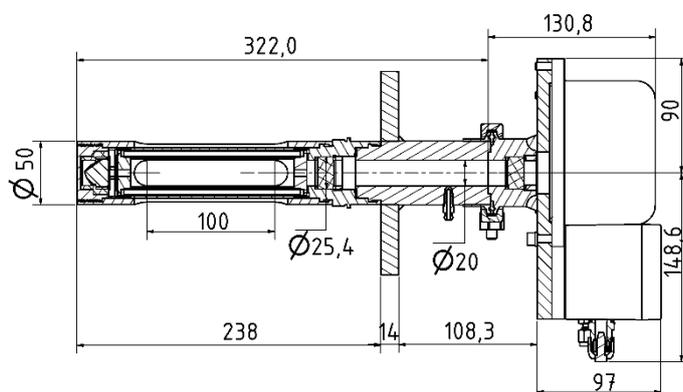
Technical drawing ILA1-B000-EX-PXX20
